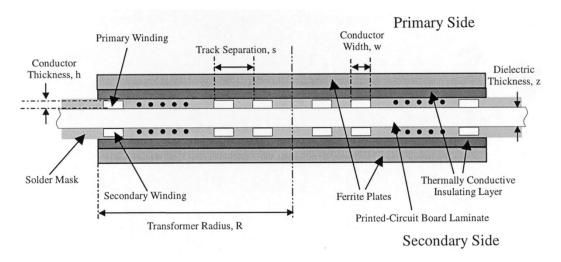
Cross-sectional structure of a PCB transformer shielded with ferrite plates.
